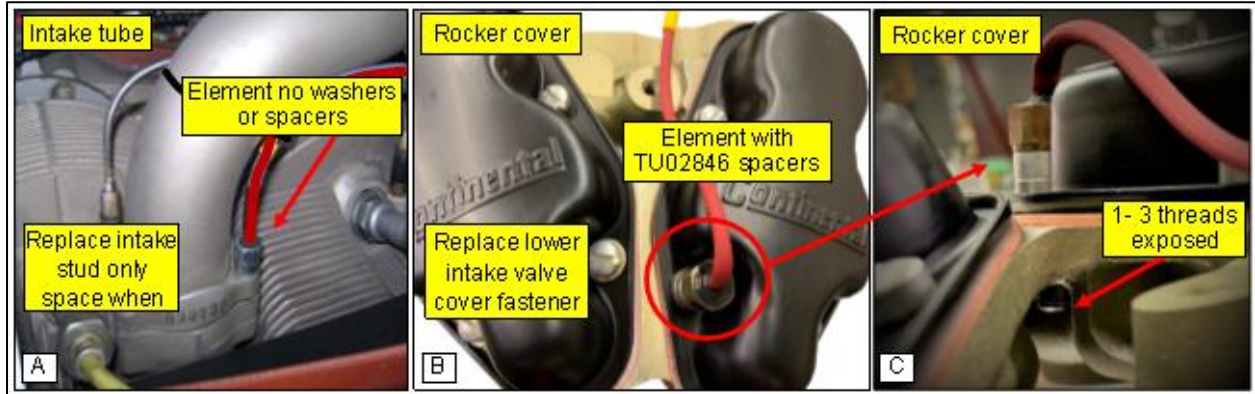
Continental large bore crossflow cylinder head w/ split rocker covers: 520 and 550.
